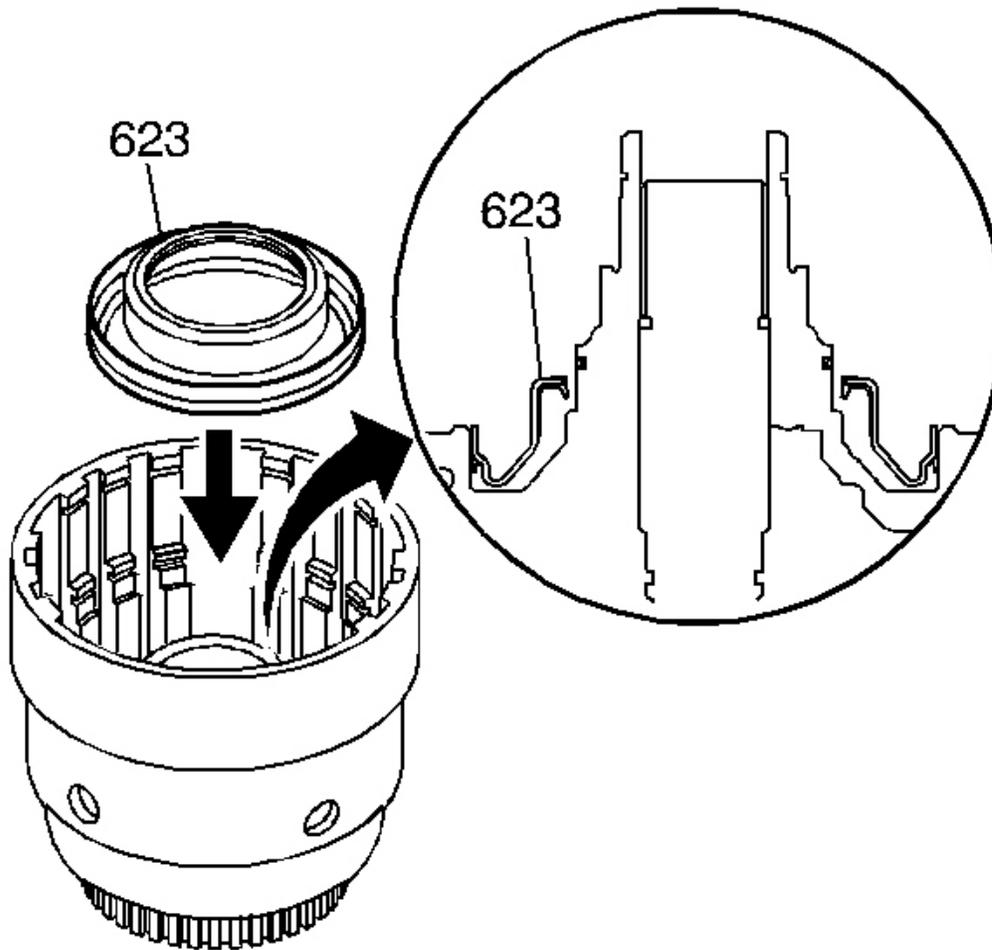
Inspecting 3rd & 4th Clutch Piston
